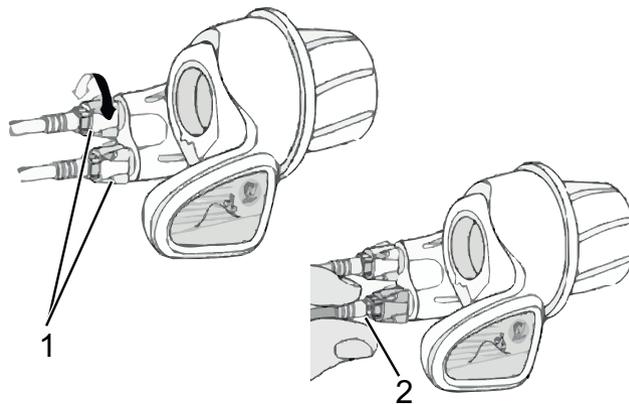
Twist grip with adjusting sleeves (1) and play of the gear shift (2)
